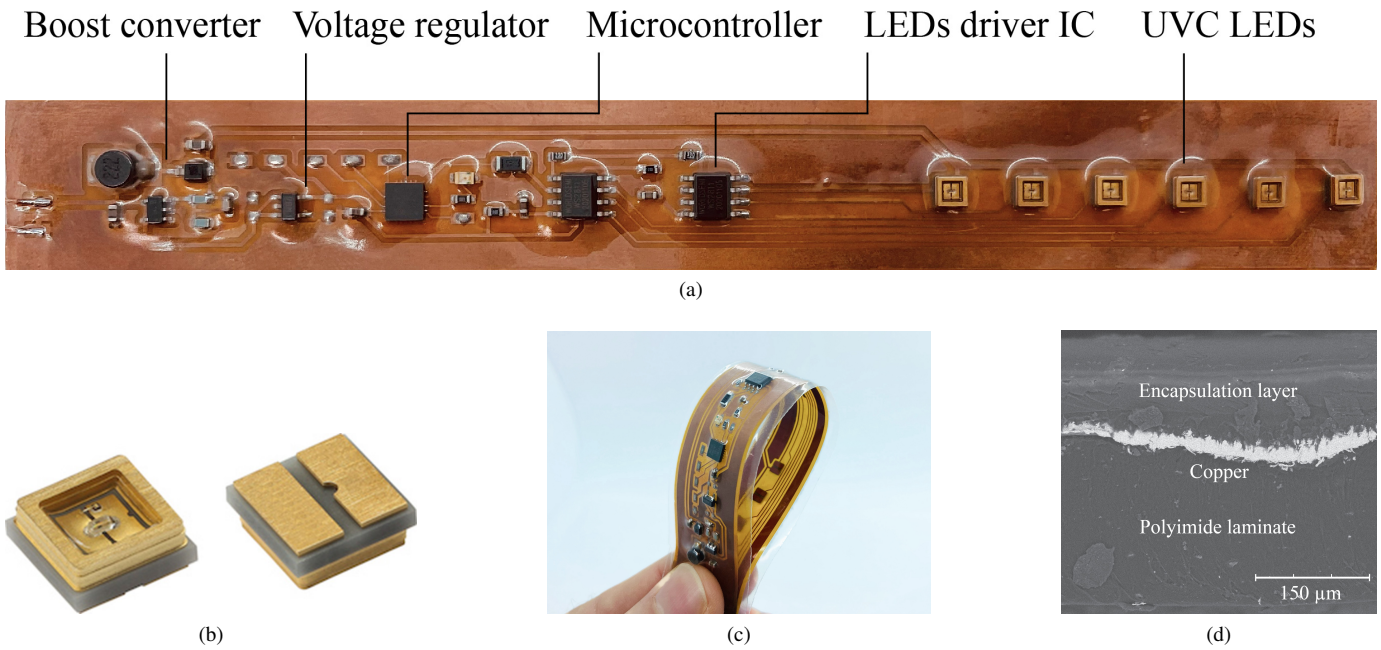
(a) Fabricated prototype of the UVC LEDs strip for smart bandage; (b) Photograph of a 265 to 285 nm ceramic packaged low power LED with silicone lens device (footprint = 3.45 mm × 3.45 mm × 1.38 mm, top isometric view (left) and bottom isometric view (right)); (c) Fully flexible circuit; (d) Scanning electron microscope photo of the cross-section of the encapsulated circuit
